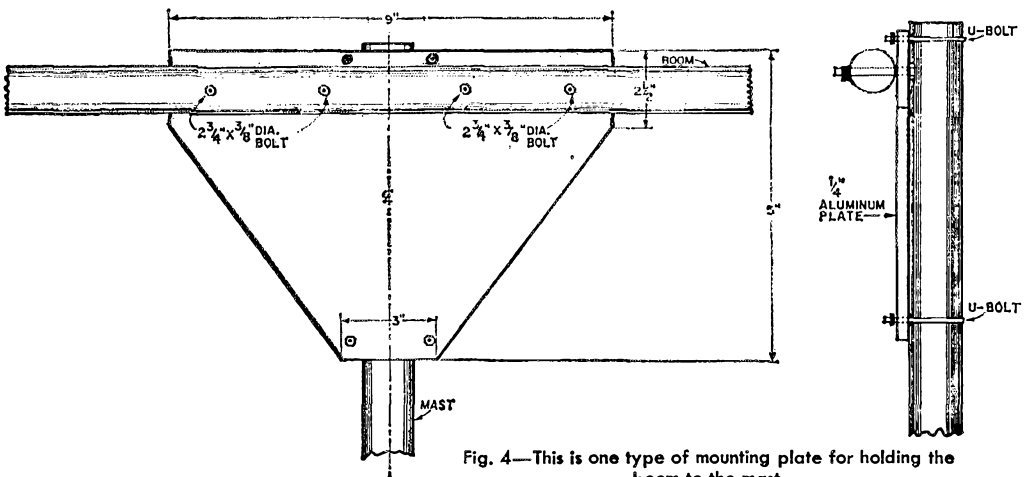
This is one type of mounting plate for holding the boom to the mast.
